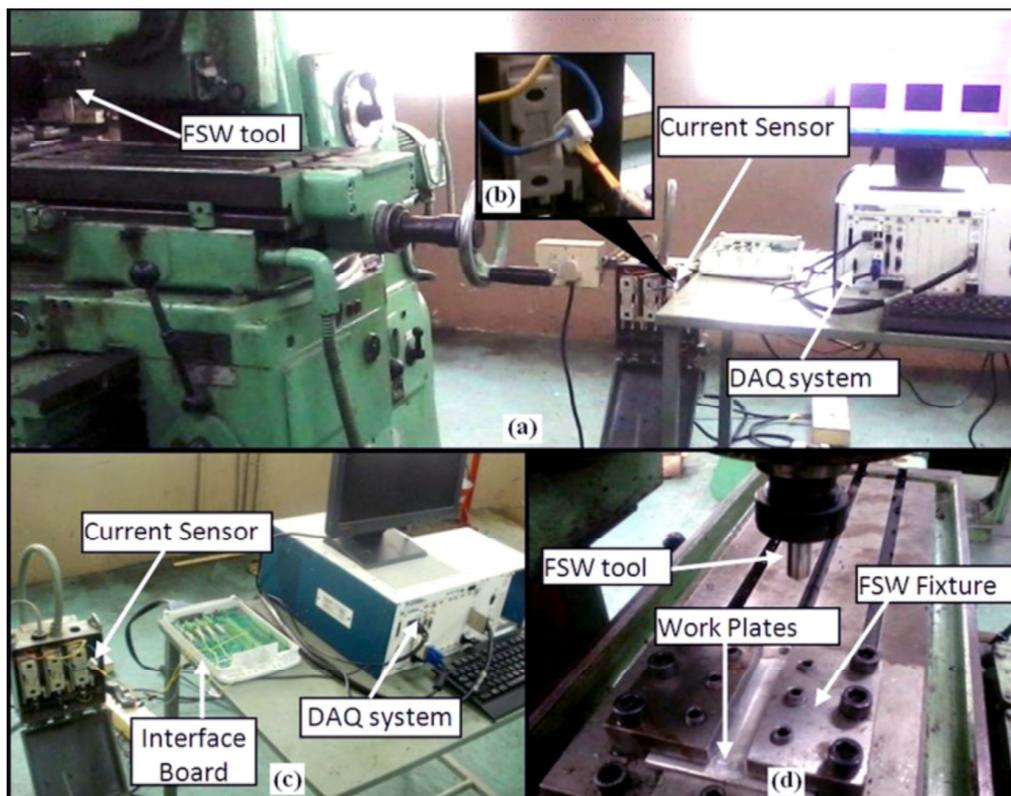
(a) FSW experimental setup; (b) Current sensor; (c) Data acquisition system; (d) FSW fixture and tool
